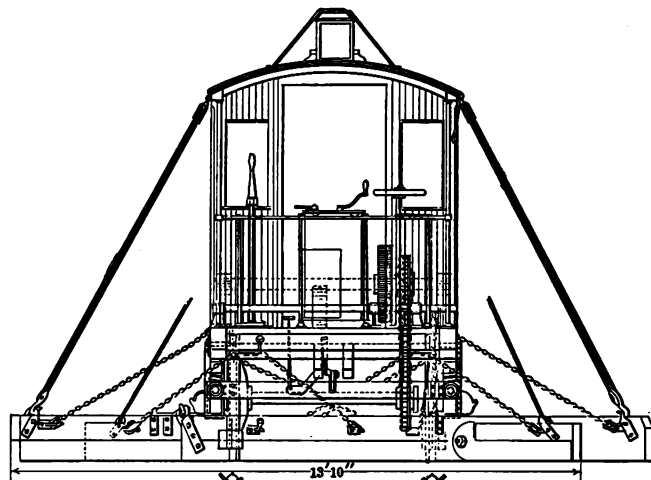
END ELEVATION OF SNOW PLOW—BUFFALO STREET RAILWAY.
